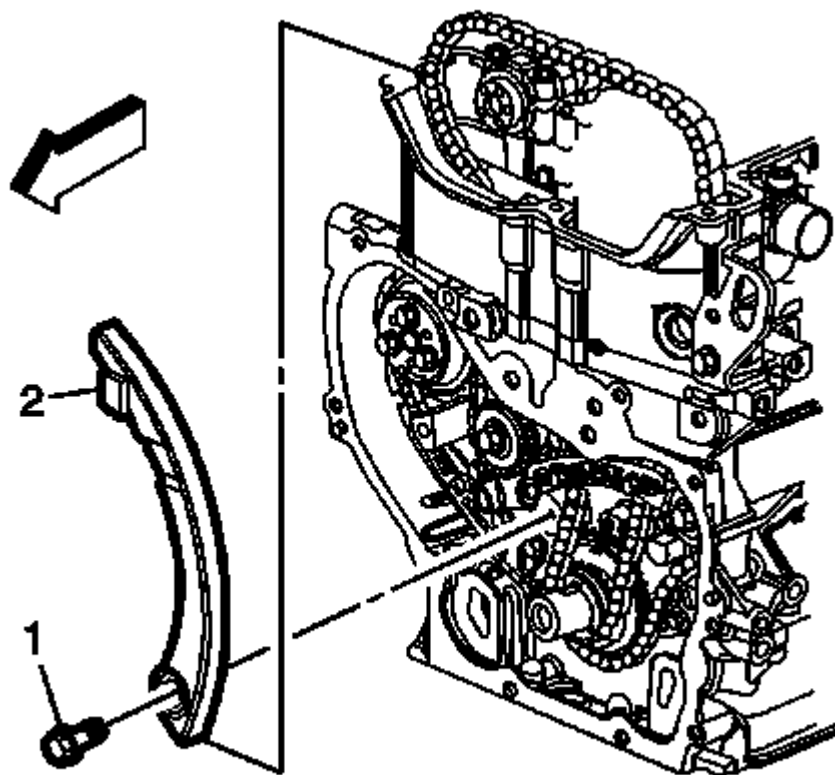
Timing Chain Tensioner Guide Bolt And Guide
